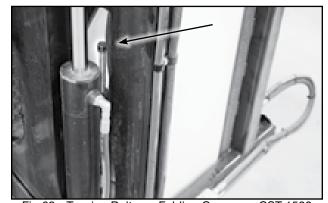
Tension Bolts on Folding Conveyor, CST-1500
